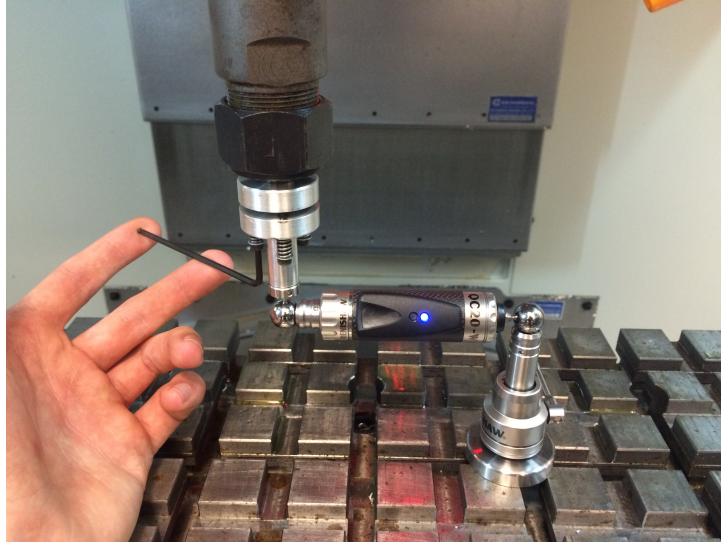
Alignment of the adjustable tool-cup, using the TMBB to check alignment during spindle rotation
